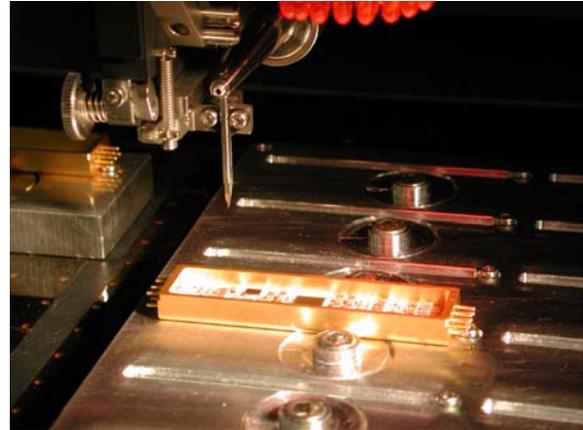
Automated Wire Bonder with Hybrid Circuit on heated parts stage: up to 12 parts can be loaded simultaneously.
